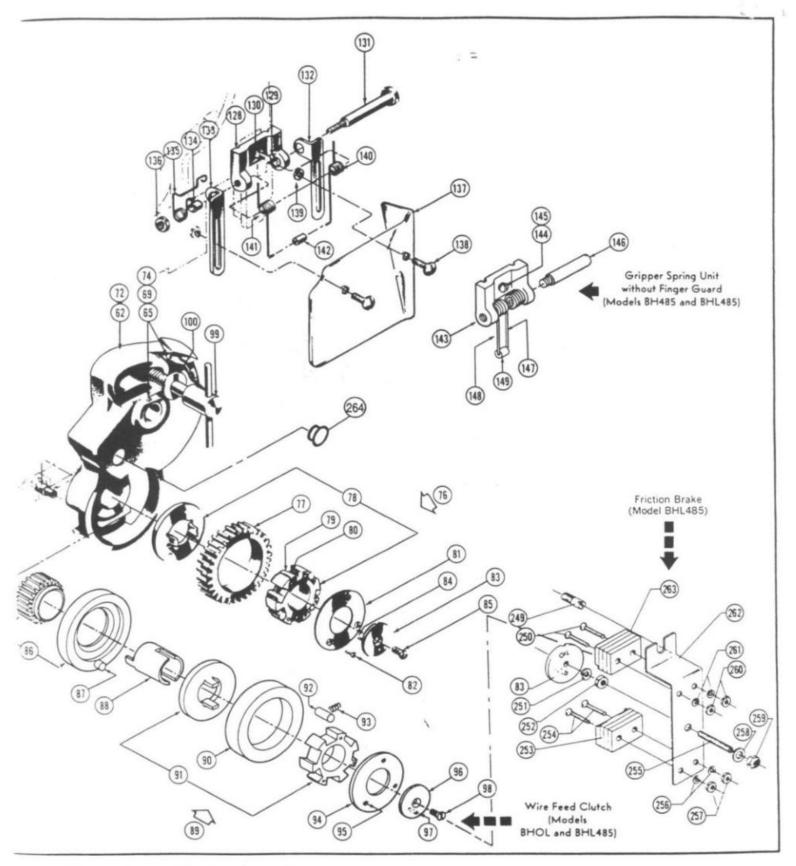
Stitcher Head Component Parts Gripper, Wire Forming, Driving Assemblies
